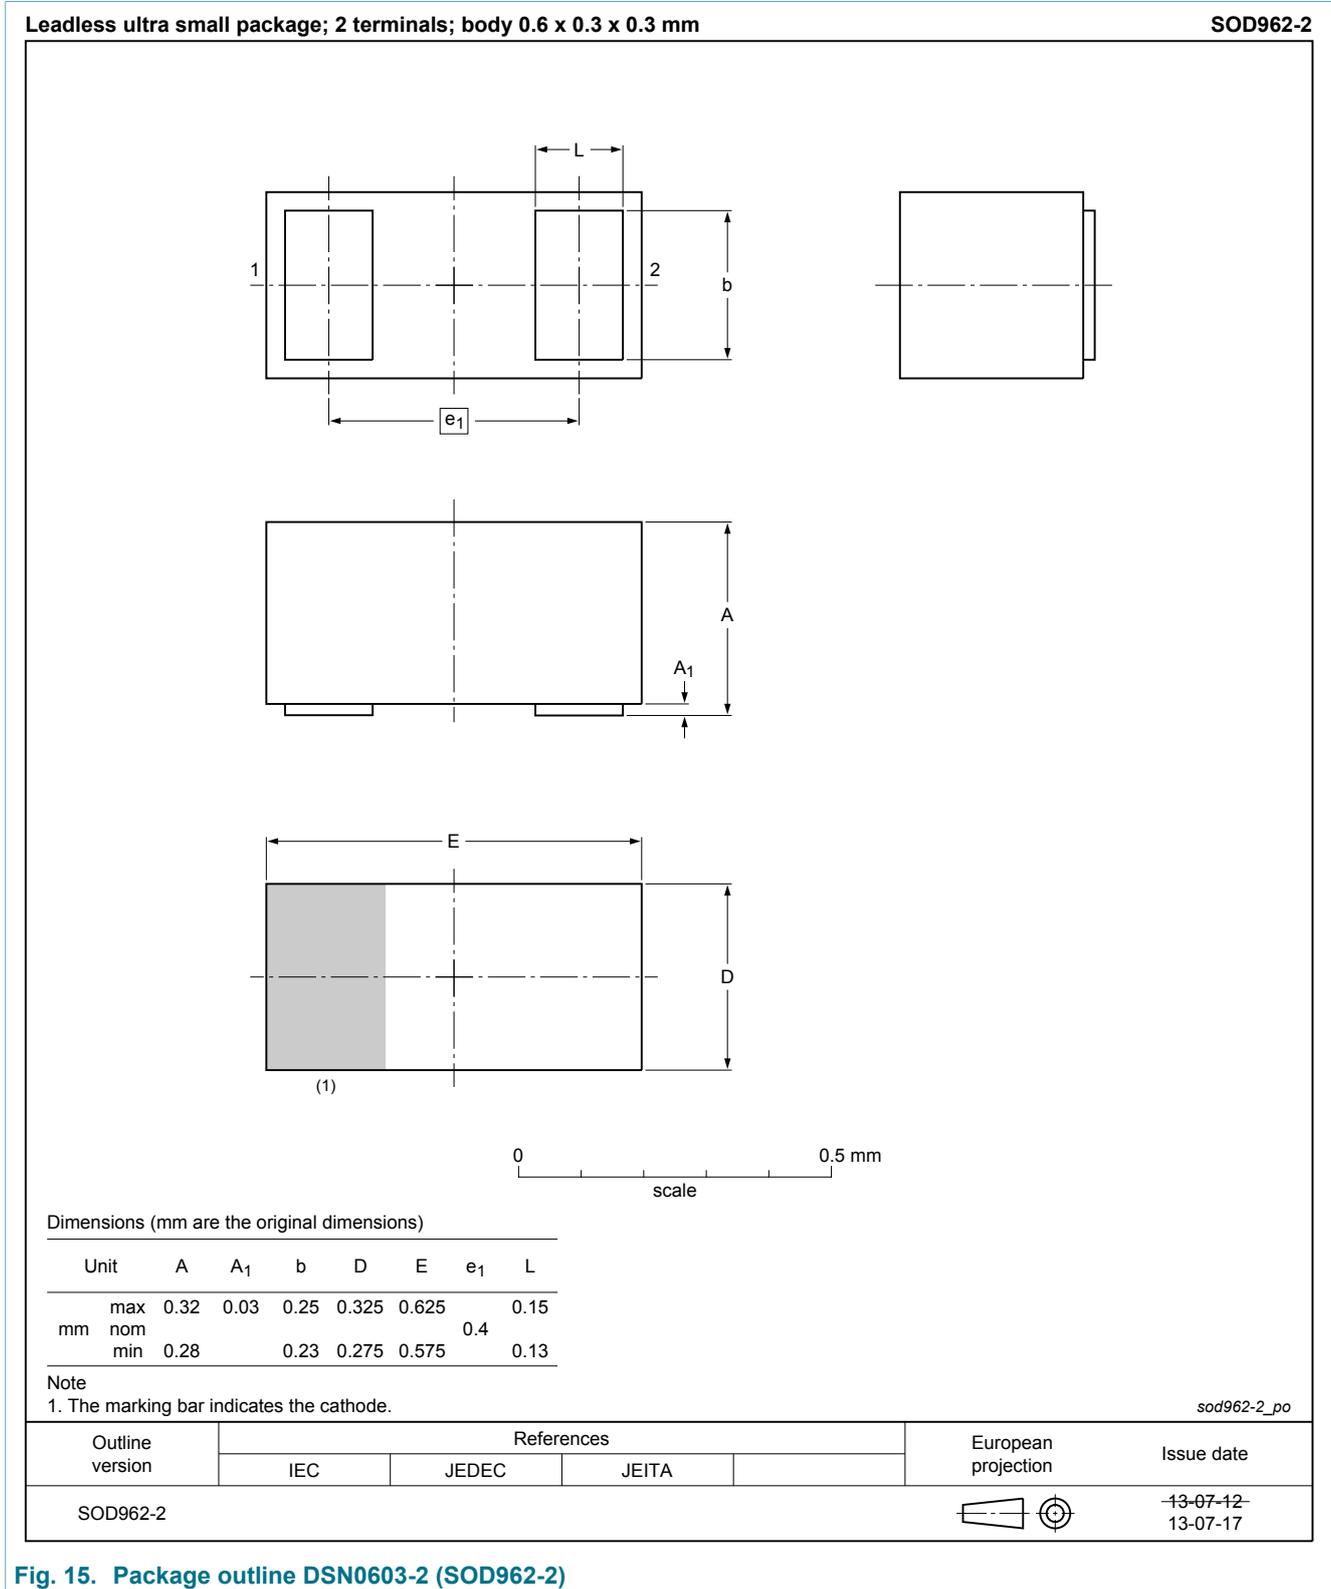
Package outline DSN0603-2 (SOD962-2)
